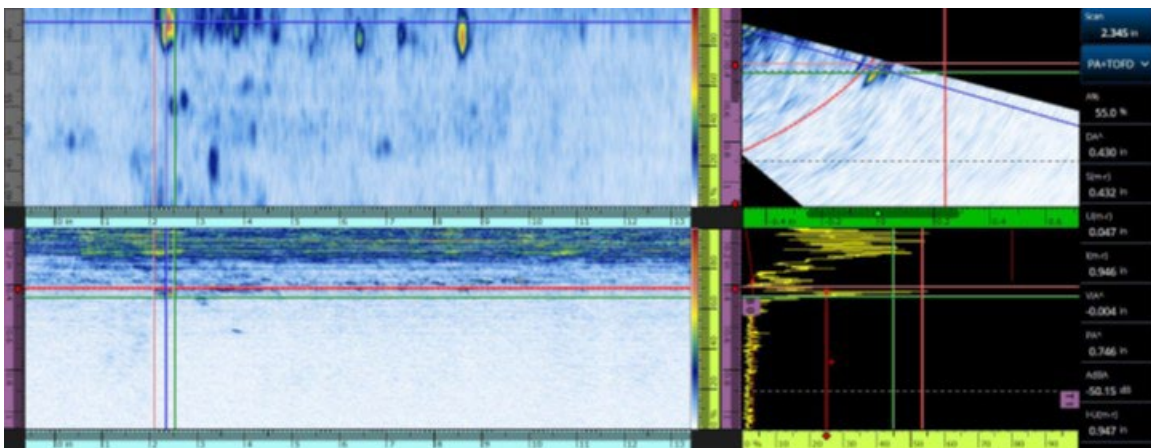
PAUT indication of defect at Location C in fillet weld test panel MGL-10 from ID-raster scan
